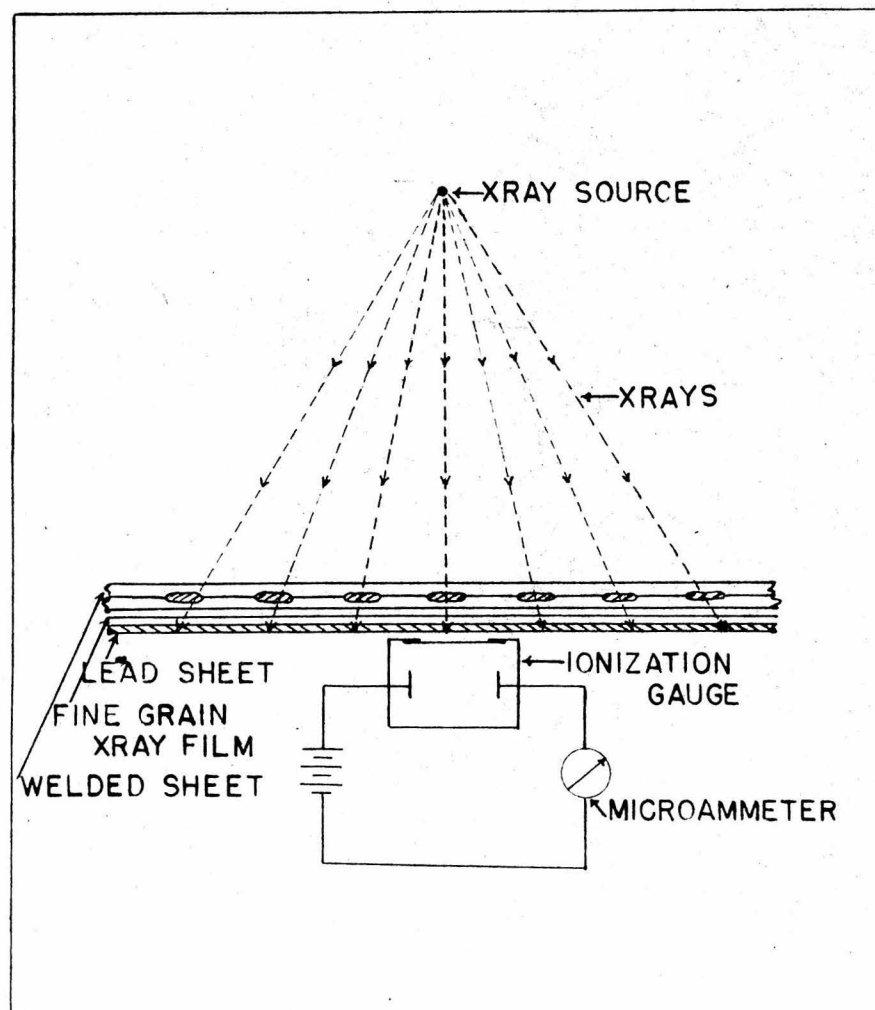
ARRANGEMENT OF EQUIPMENT FOR IONIZATION GAUGE TESTS OF SPOTWELDS.
